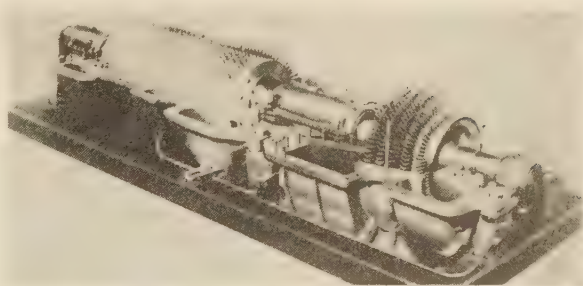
GAS-TURBINE-DRIVEN COMPRESSOR SET FOR HOUDRY PROCESS WITH TOP CASING REMOVED
